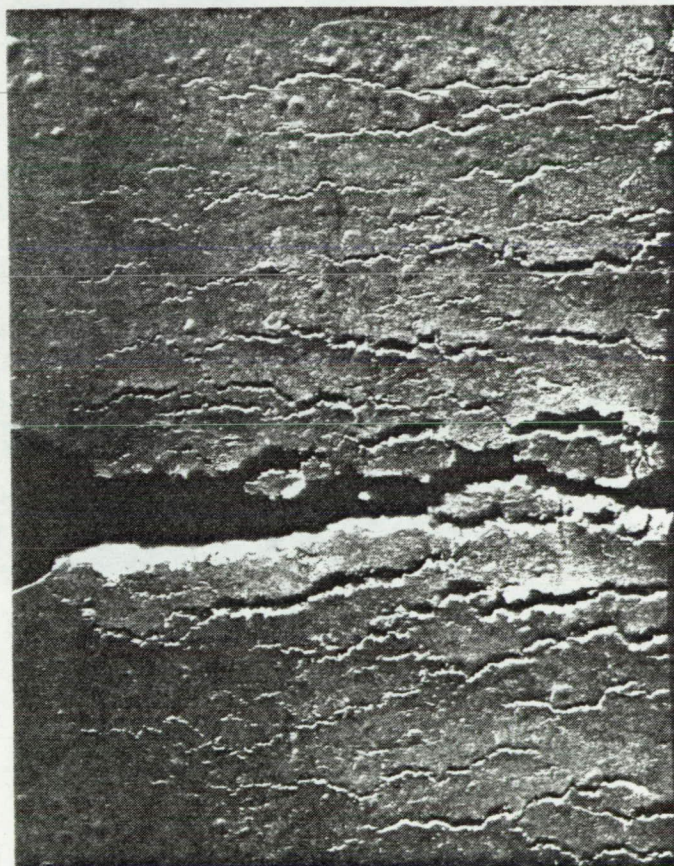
Surface crack pattern of fractured Specimen No. III-T1
